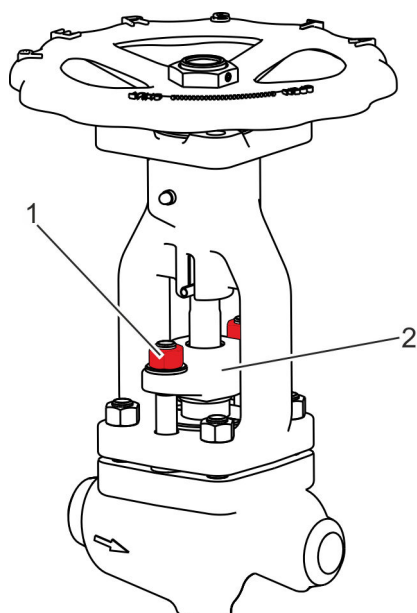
Unscrewing the threaded connections on the gland follower flange
